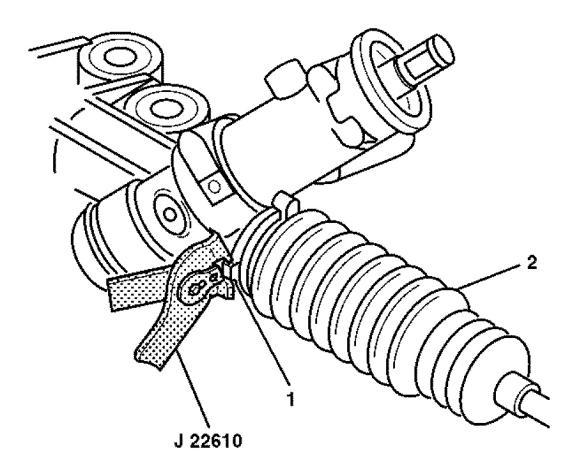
Installing Inner Tie Rod Boot Clamp Courtesy of GENERAL MOTORS CORP.
